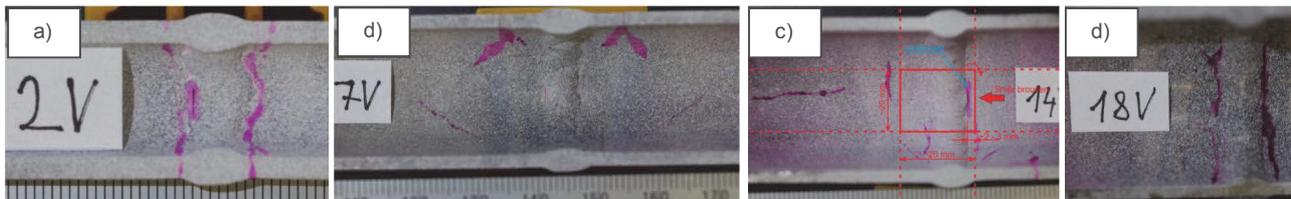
Appearance of inner surface of tubular bodies with detected defects
